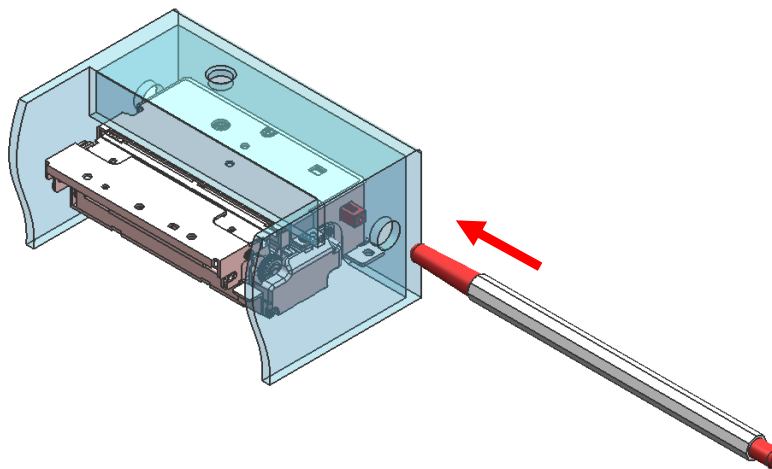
Example illustration of designing the method to clean cutter jam using tools
